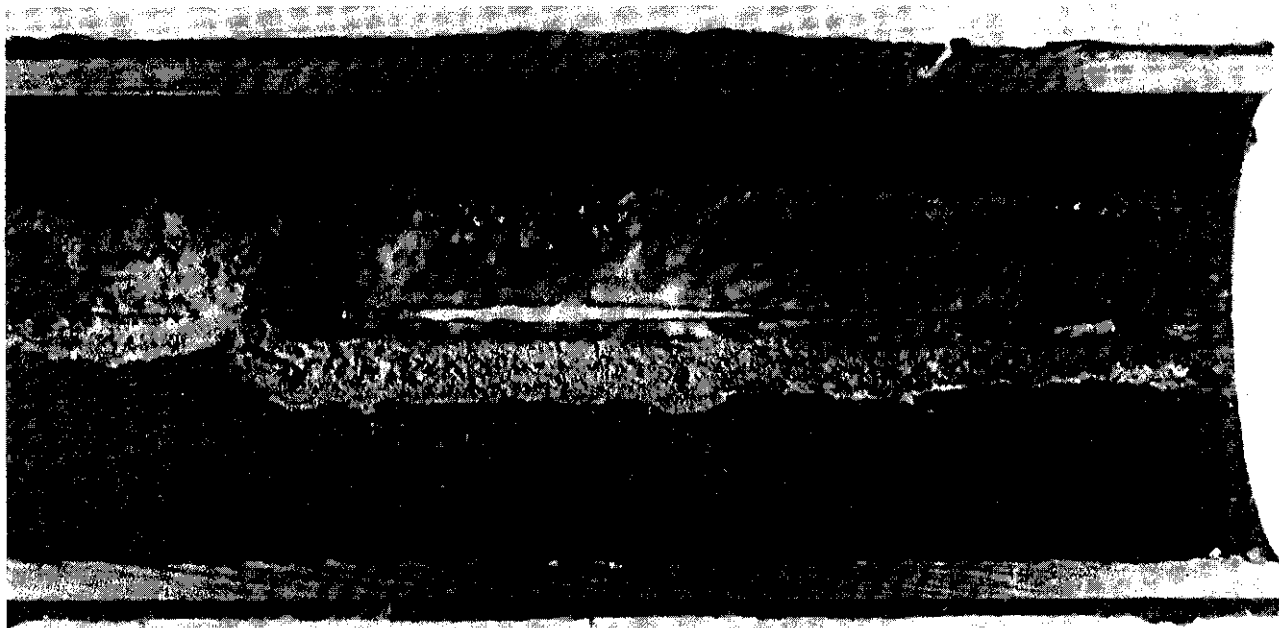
Internal corrosion along the weld seam in ERW pipe.
